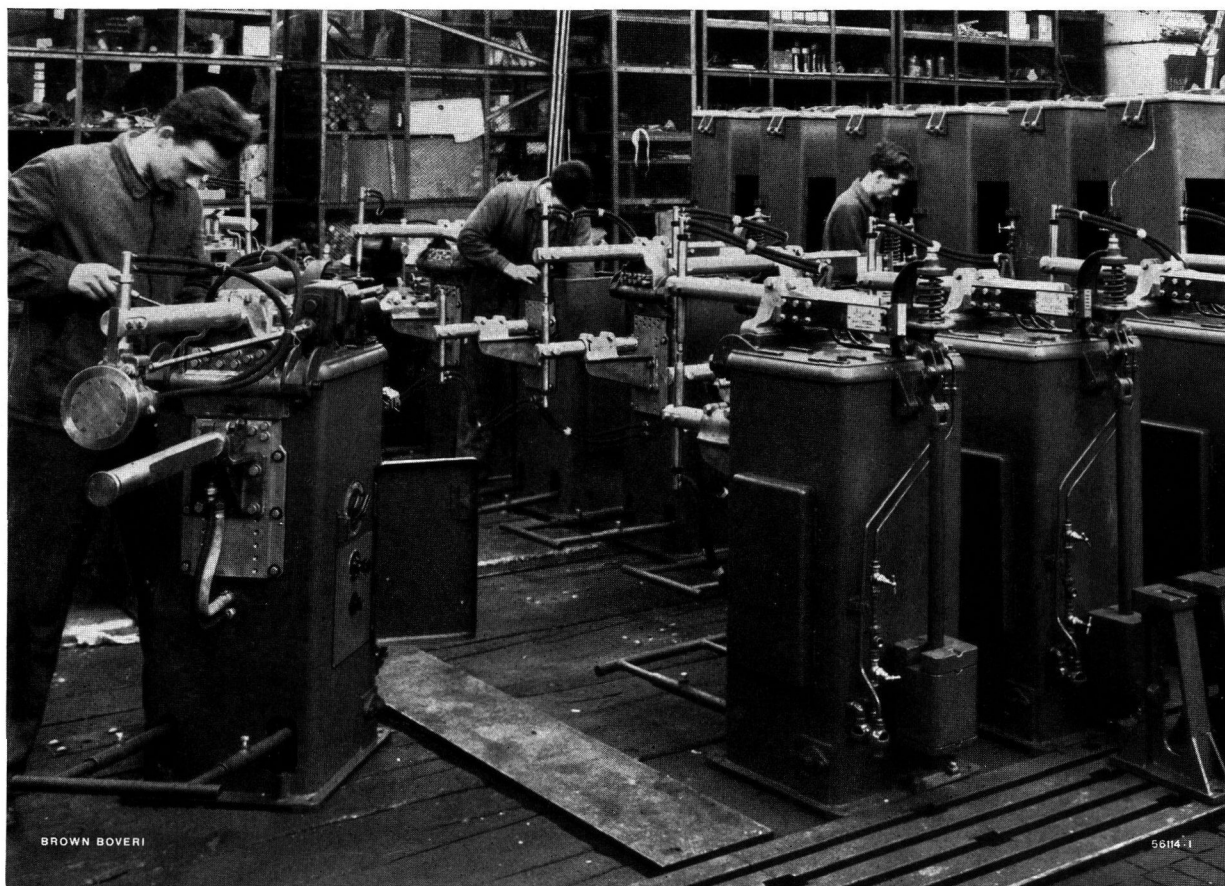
View of spot and seam welding machine assembly bay.
